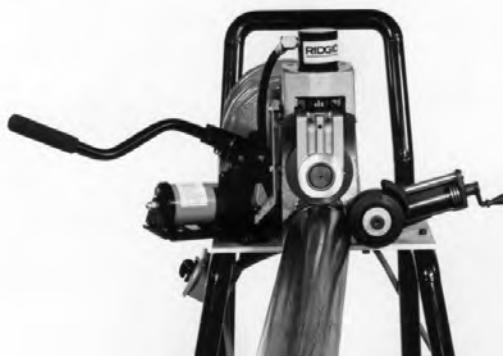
Squaring Pipe up against Flange of Drive Roll
